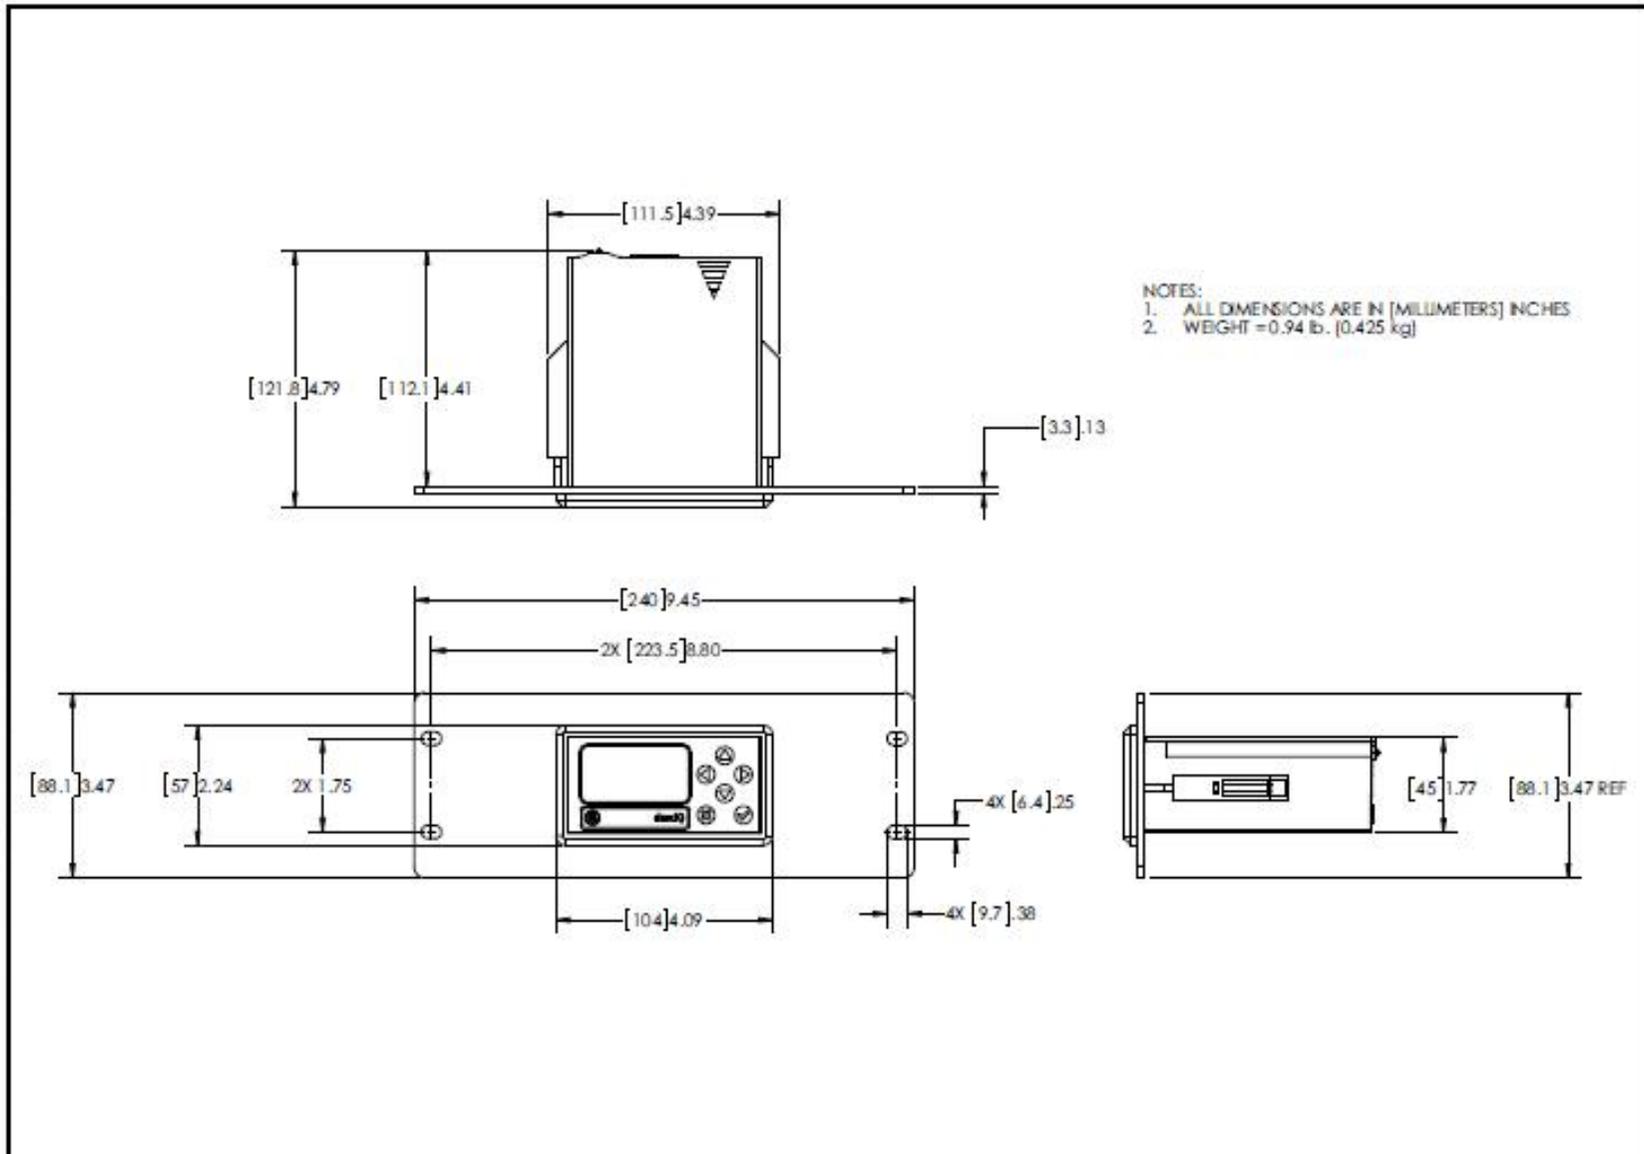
Panel Mount Outline & Installation (ref: dwg 712-1825)
